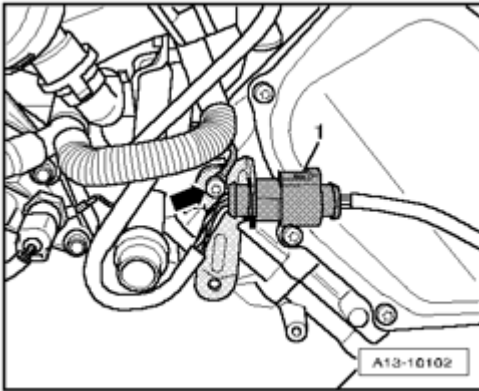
Disconnecting Electrical Connector & Removing Bolt & Retainer For Connection
